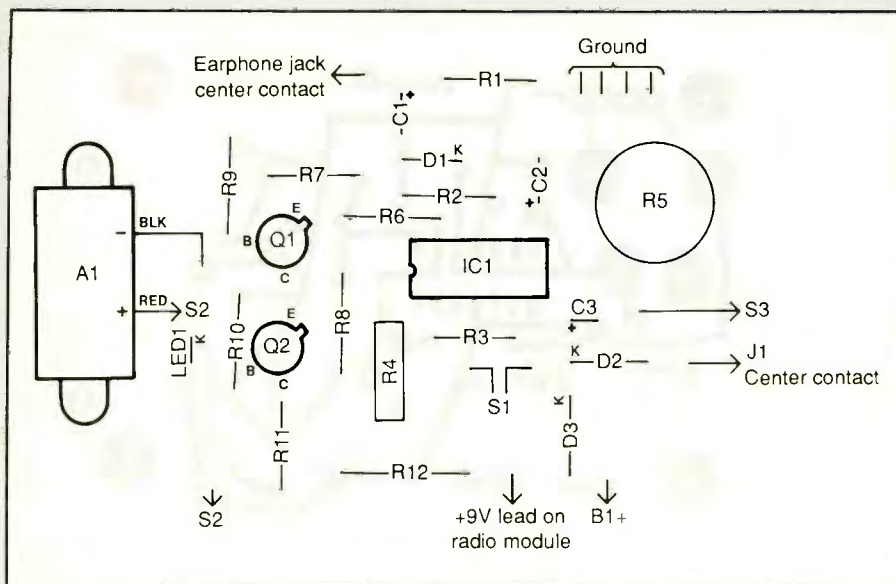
Wiring diagram for LEW's printed-circuit board. Use this as a rough guide to component layout if you wire the circuit on perforated board.
